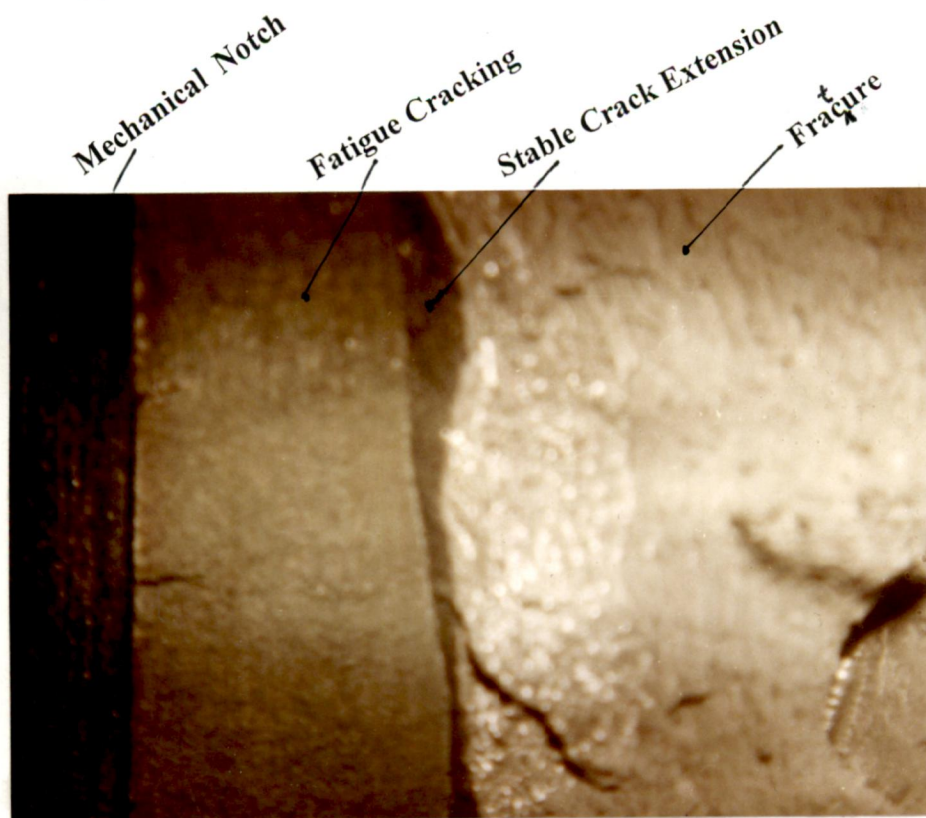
Typical photograph showing stable crack extension ($\Delta a_p = 0.56\text{ mm}$) in C-Mn Steel weld.
